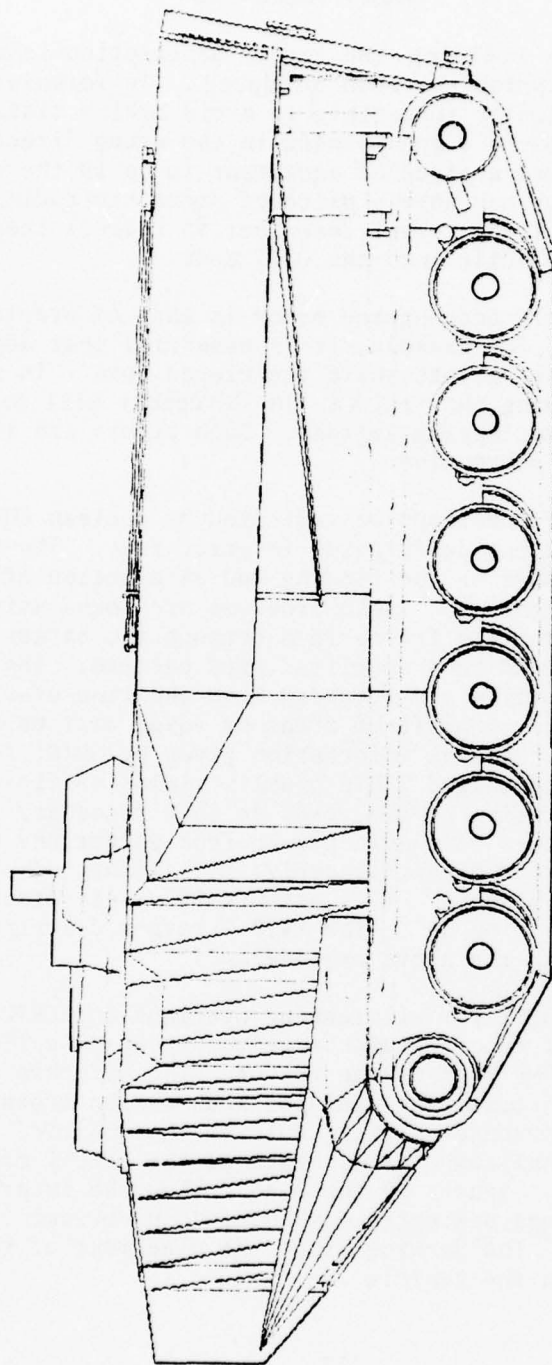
Computer Drawing of the Left Side View of the LVTP-7
